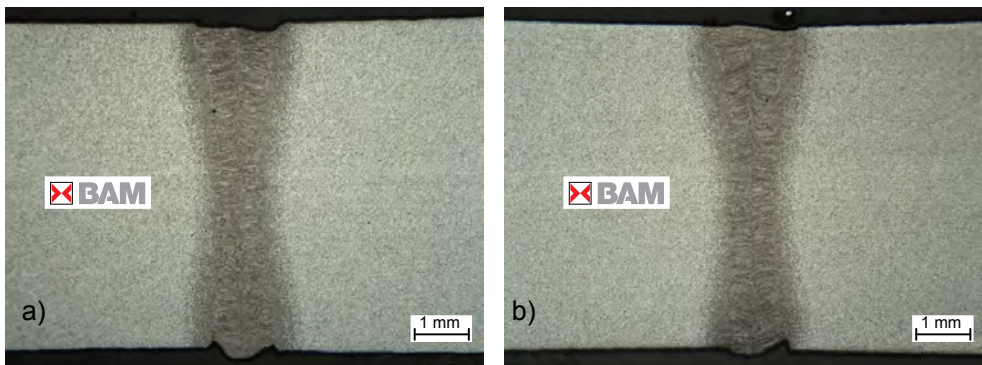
Cross sections for laser beam weldments: a) extracted from middle of specimen, b) extracted from last third of specimen; $P_{\text{Laser}} = 8 \text{ kW}$, $v_{\text{Weld}} = 3.0 \text{ m min}^{-1}$, focus position $f = -6 \text{ mm}$, material: S355J2+N; remaining parameters see Table 3.2 and section 3.1
